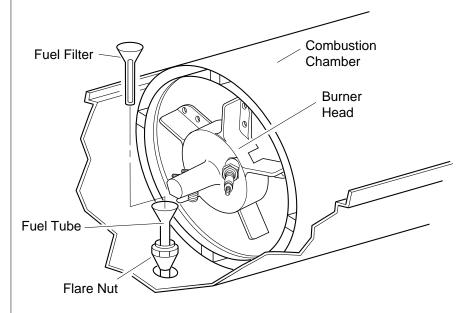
Fuel Filter Removal, 150,000 BTU/Hr Model
